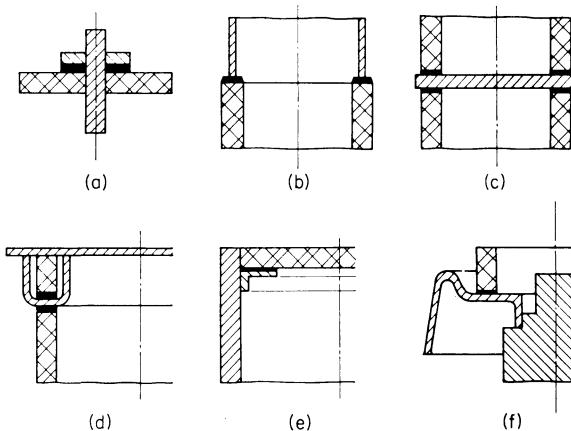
Ceramic-metal butt seals: (a) rod seal; (b) cylindrical seal; (c, d) disc seals; (e) window seal; (f) elastic seal
